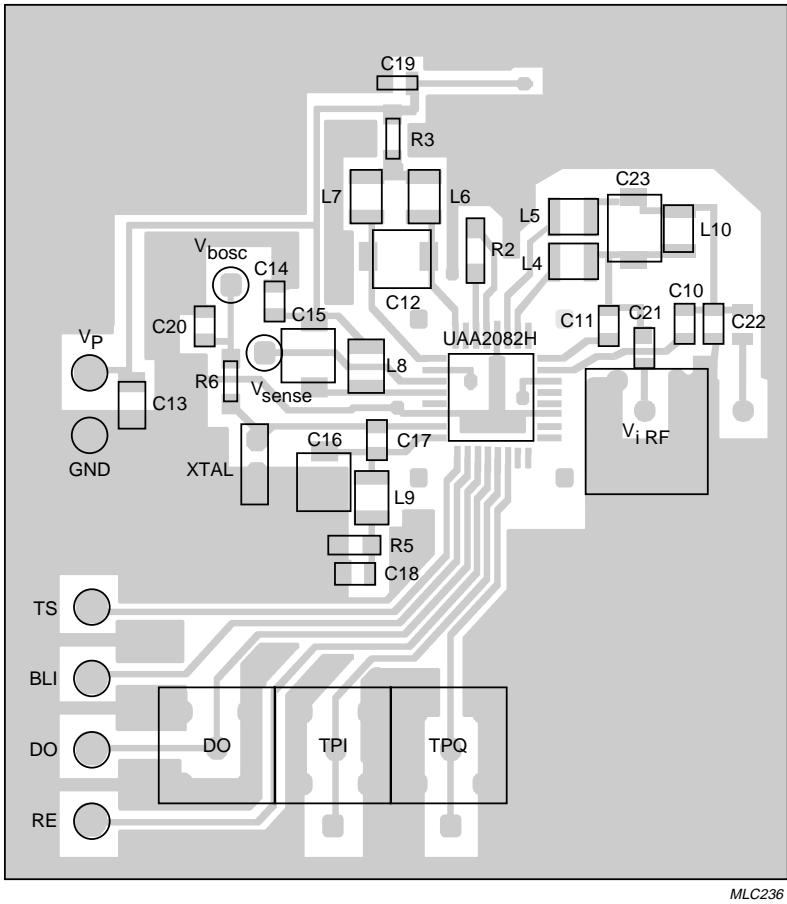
PCB top view with components for LQFP32; test circuit Fig.5.
